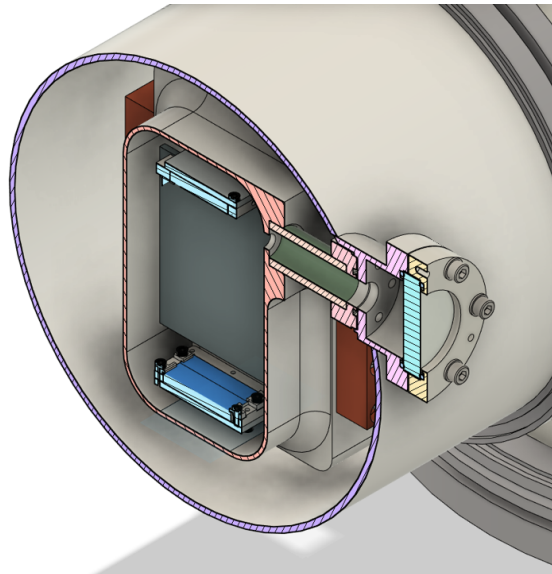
This CAD drawing shows the peculiar system which sustains the pressurized vessel. The entrance of the laser beam is on the right.
